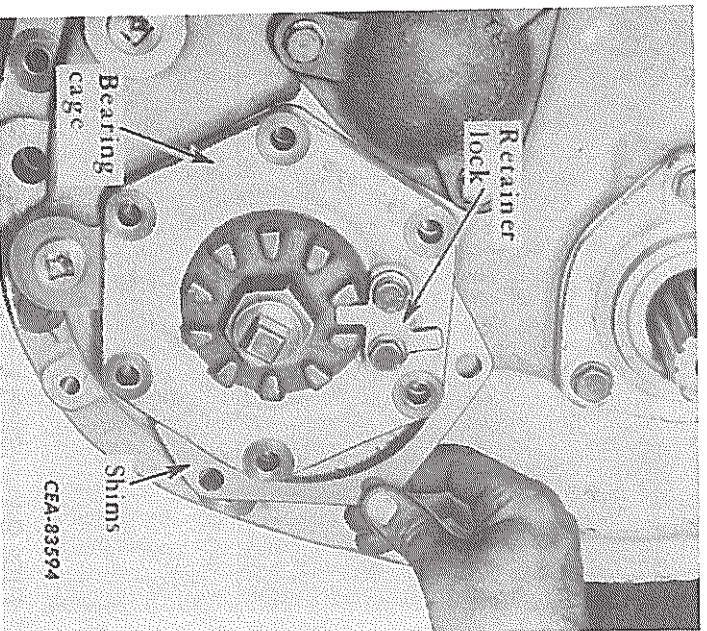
Installing the Pinion Shaft Front Bearing Cage Shims
